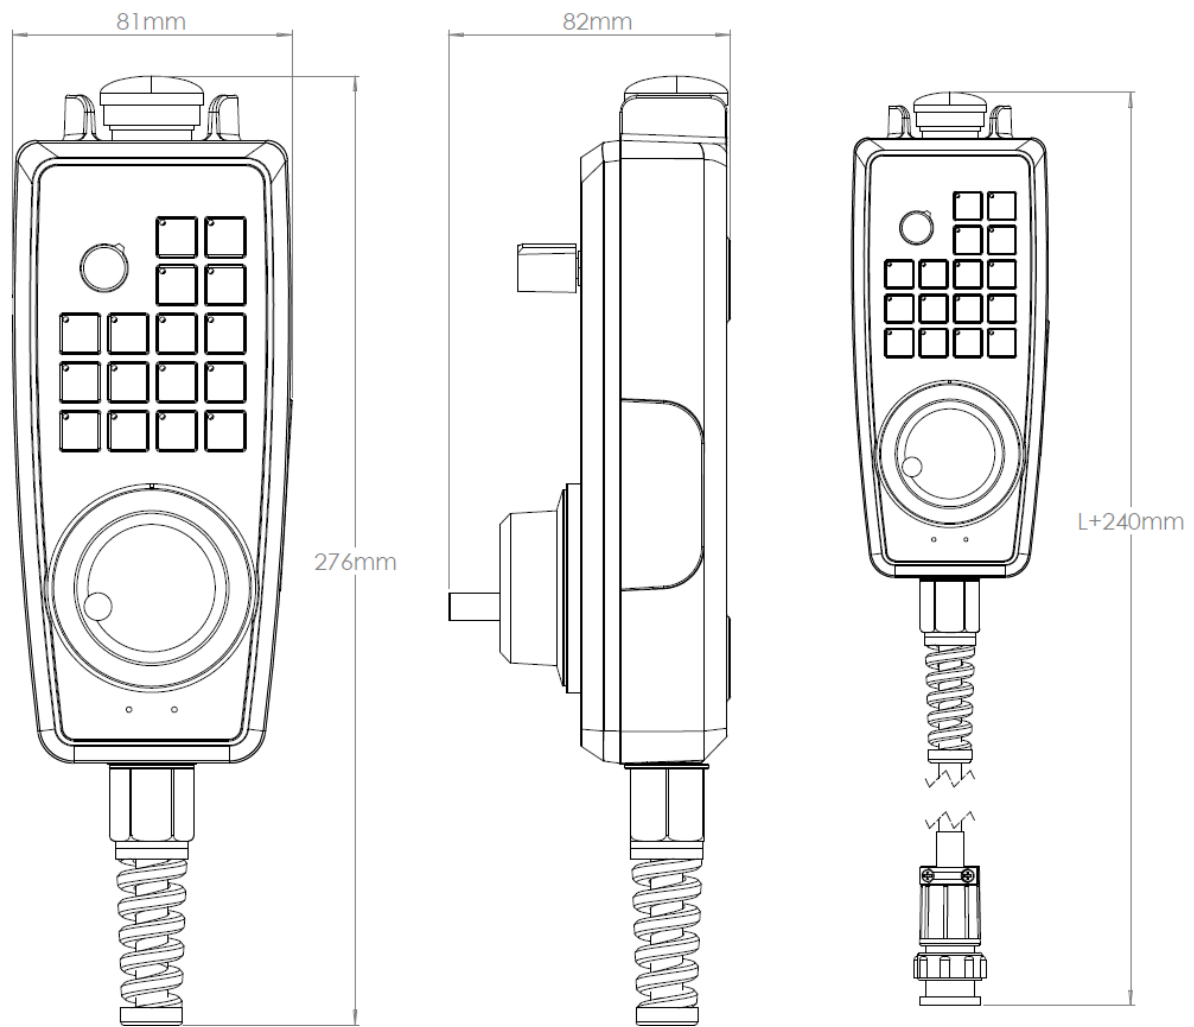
Remote Pendant Lite Dimensions (mm)
